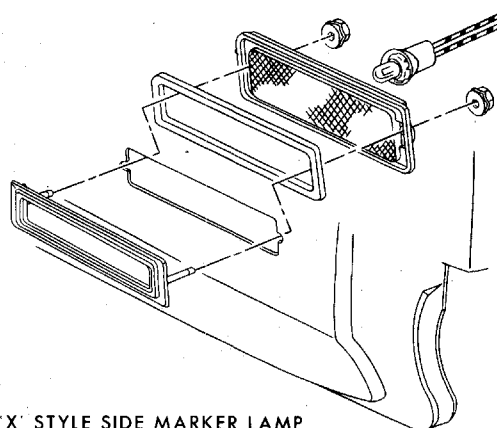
Exterior Lamp Installation - Pontiac Styles
